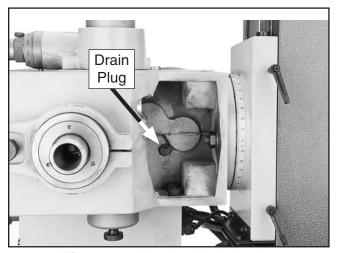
Headstock drain plug (headstock tilted 90° for clarity).
